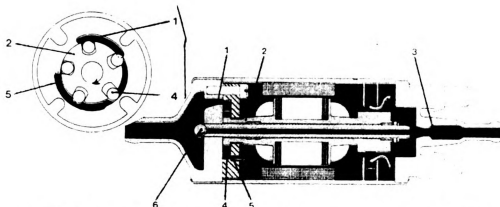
The Weber roller-cell type pump with a section through the roller chamber; 1. Inlet port; 2. Pump rotor; 3. Non-return valve; 4. Rollers; 5. Delivery port; 6. Pressure relief valve (after Garrett, T. K., 1991)
